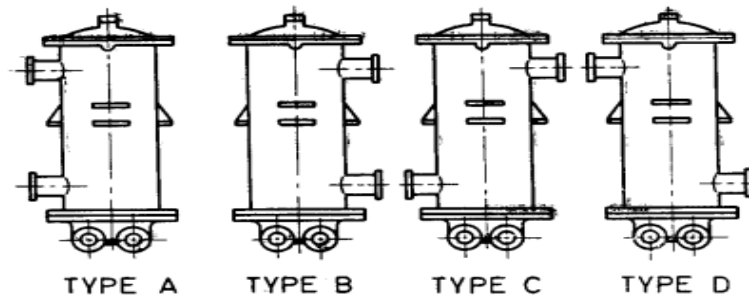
SUSPENDED MOUNTED (SM) TYPE HEAT EXCHANGERS
